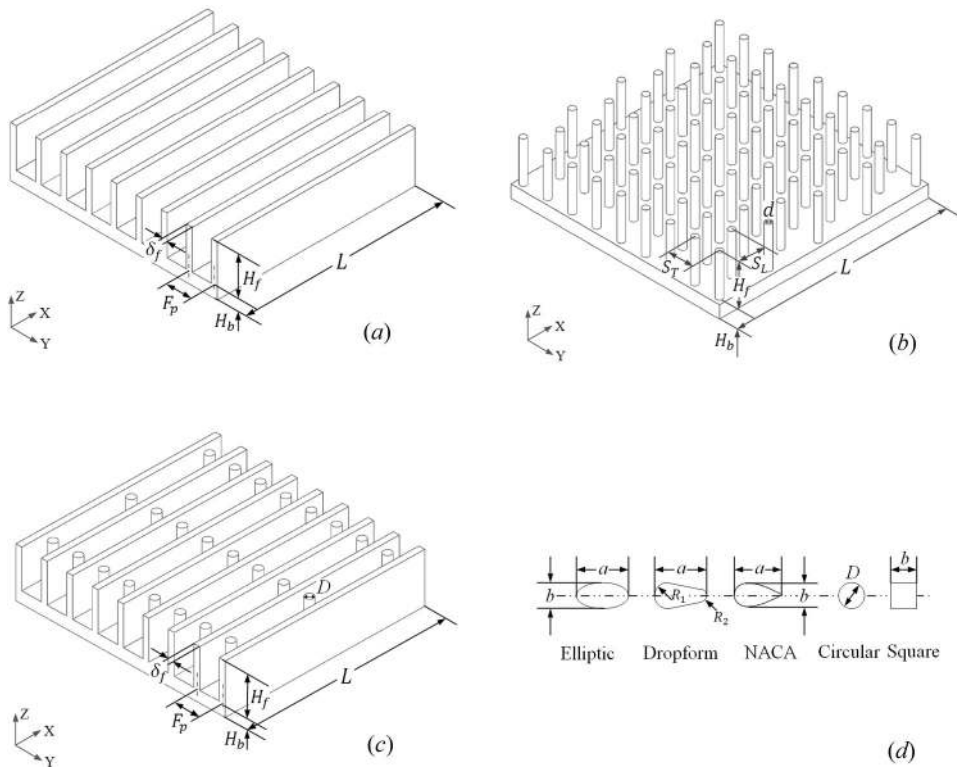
Some schematic diagram: (a) Plate fin heat sink; (b) pin fin heat sink; (c) plate-pin fin heat sink; and (d) cross-sections of the five types of pins.
